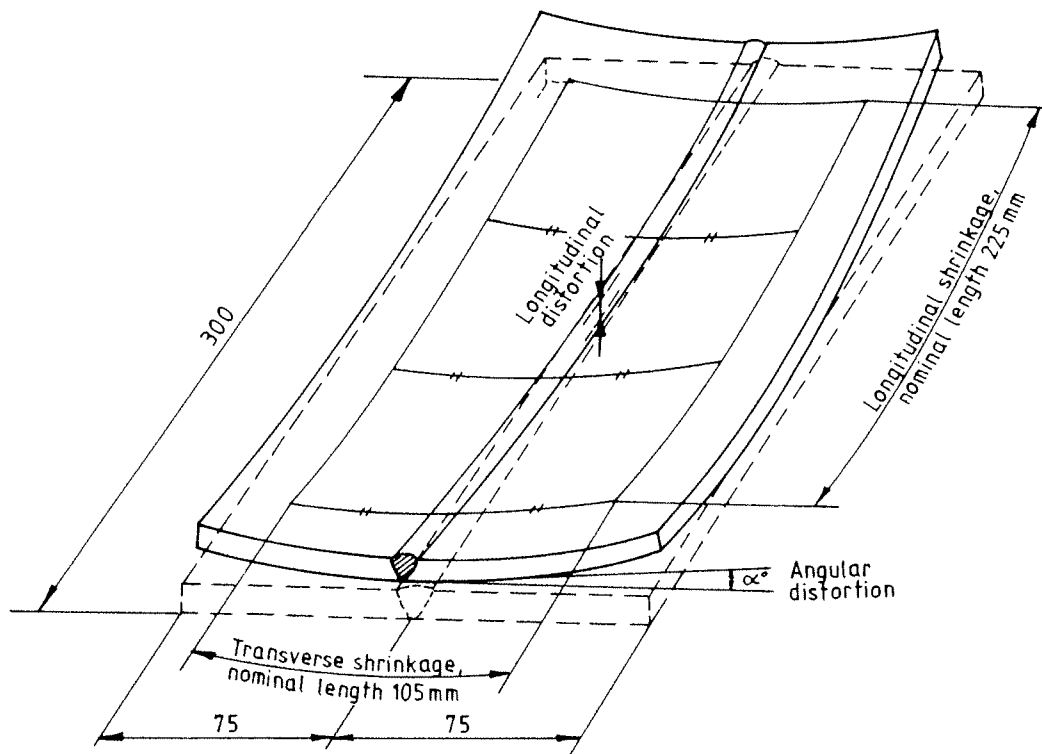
Weld distortion test pieces. The geometry of the test pieces and the measuring points are presented. Material thickness 4 mm.
